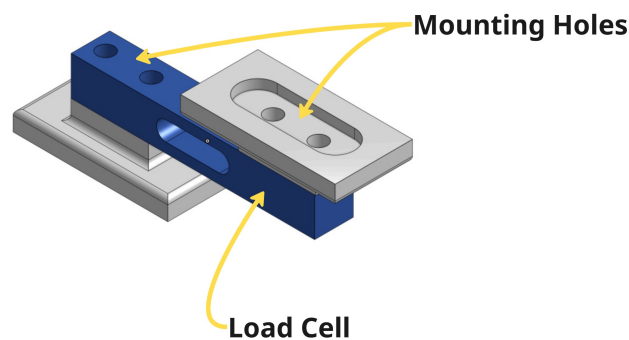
Isometric CAD view of the load cell mounting assembly. The NOYITO 1 kg load cell (LC1) is secured via M4 bolts through the mounting holes on each end. The scale platform rests on the load cell's upper flexure surface.
